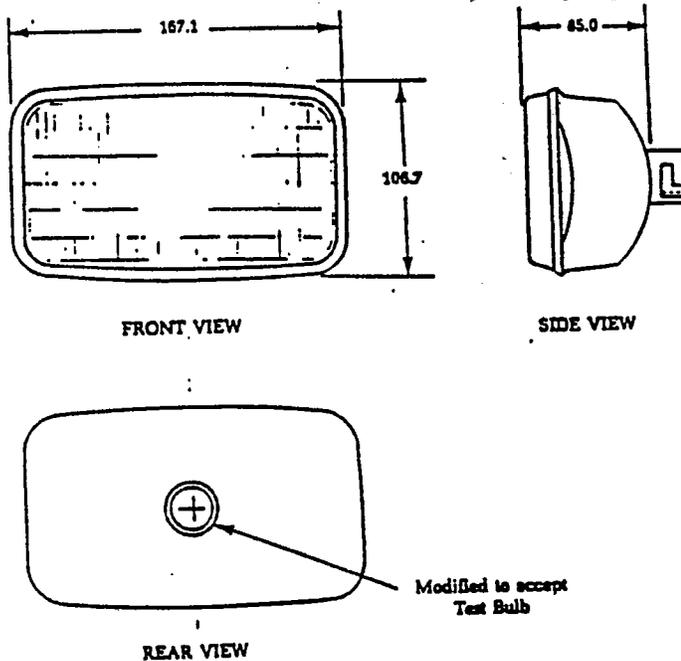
TEST ENCLOSURE DIMENSIONS
